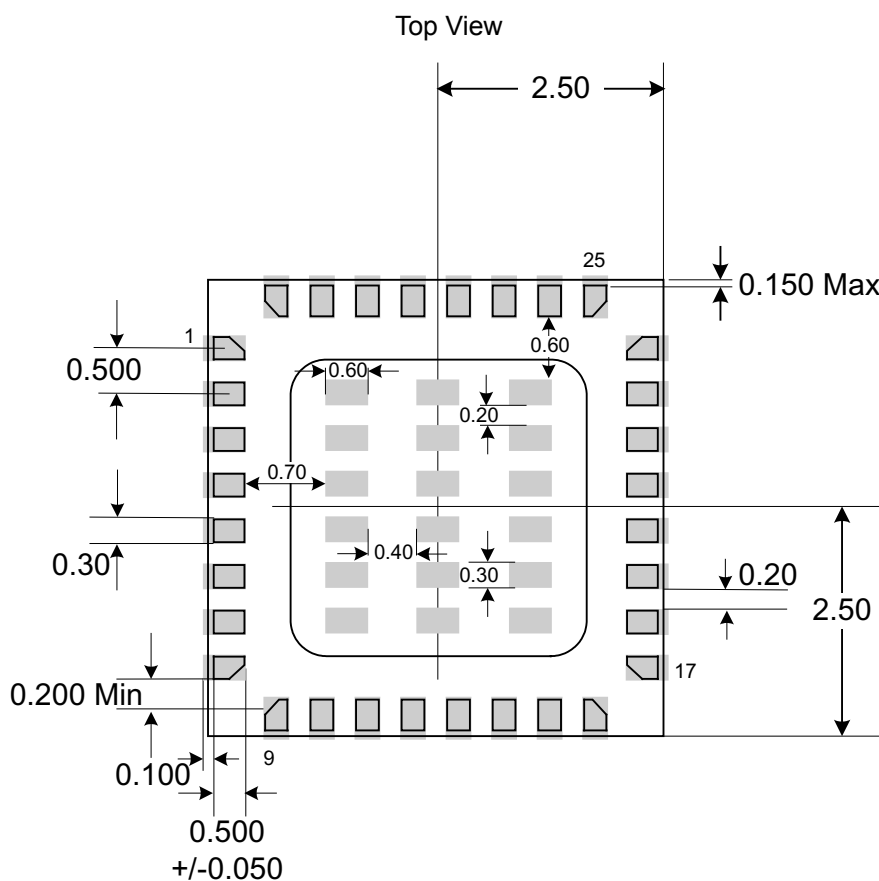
Typical Solder Paste Diagram for QFN-32 Package
